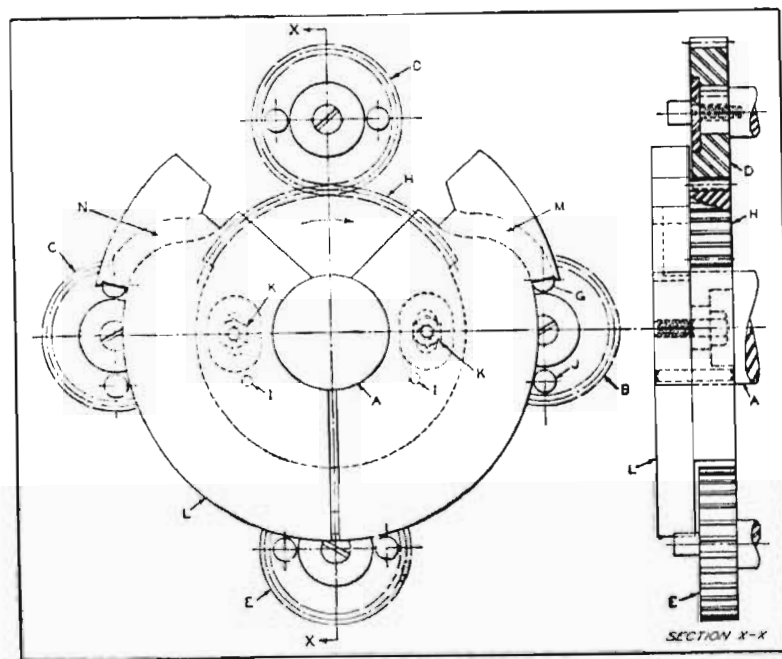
Mechanism by Means of which Shaft A Intermittently Drives and Locks the Four Gears B, E, C, and D.
